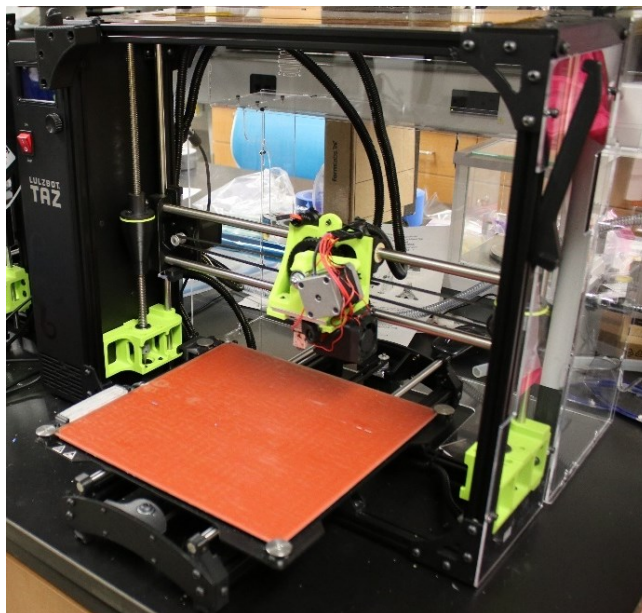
Photograph of Lulzbot TAZ 6 3D printer with LulzBot Flexystruder Tool Head v2.
